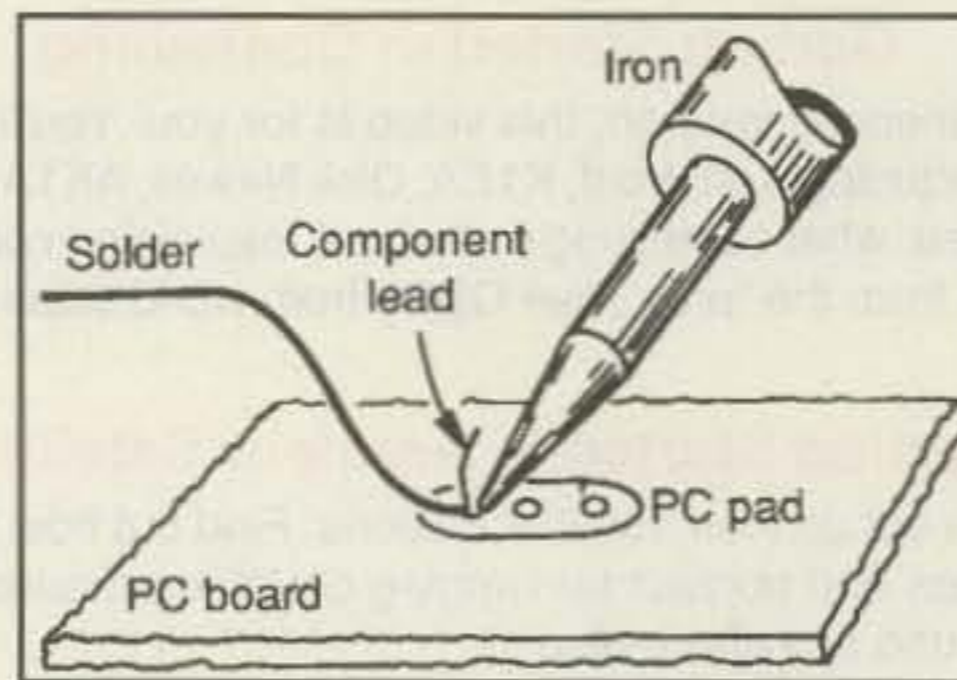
Proper soldering calls for heating both surfaces before feeding solder to the joint, as shown above.
